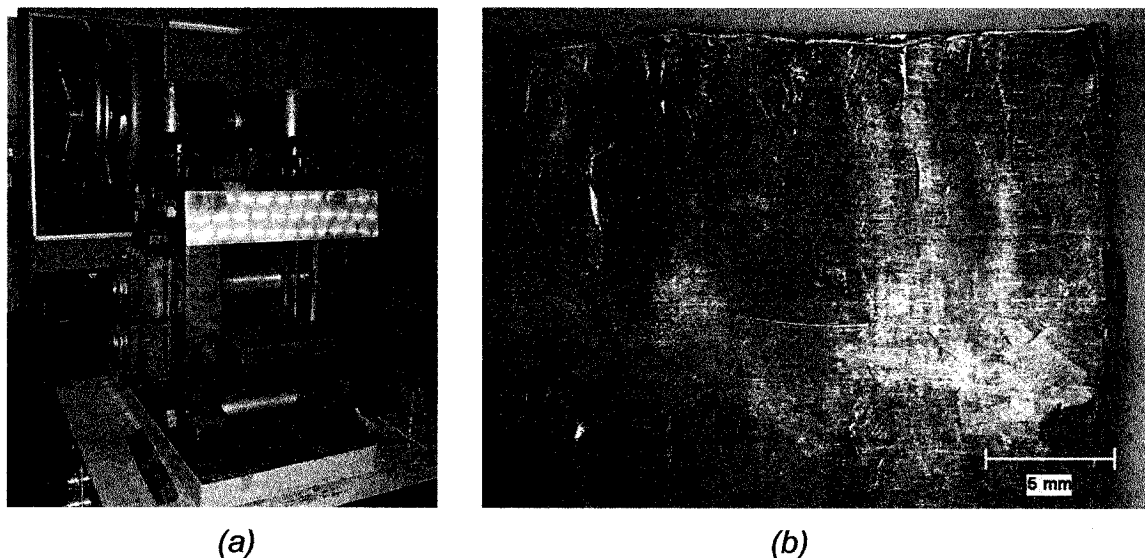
(a) Stanat rolling machine and (b) magnesium sheet
